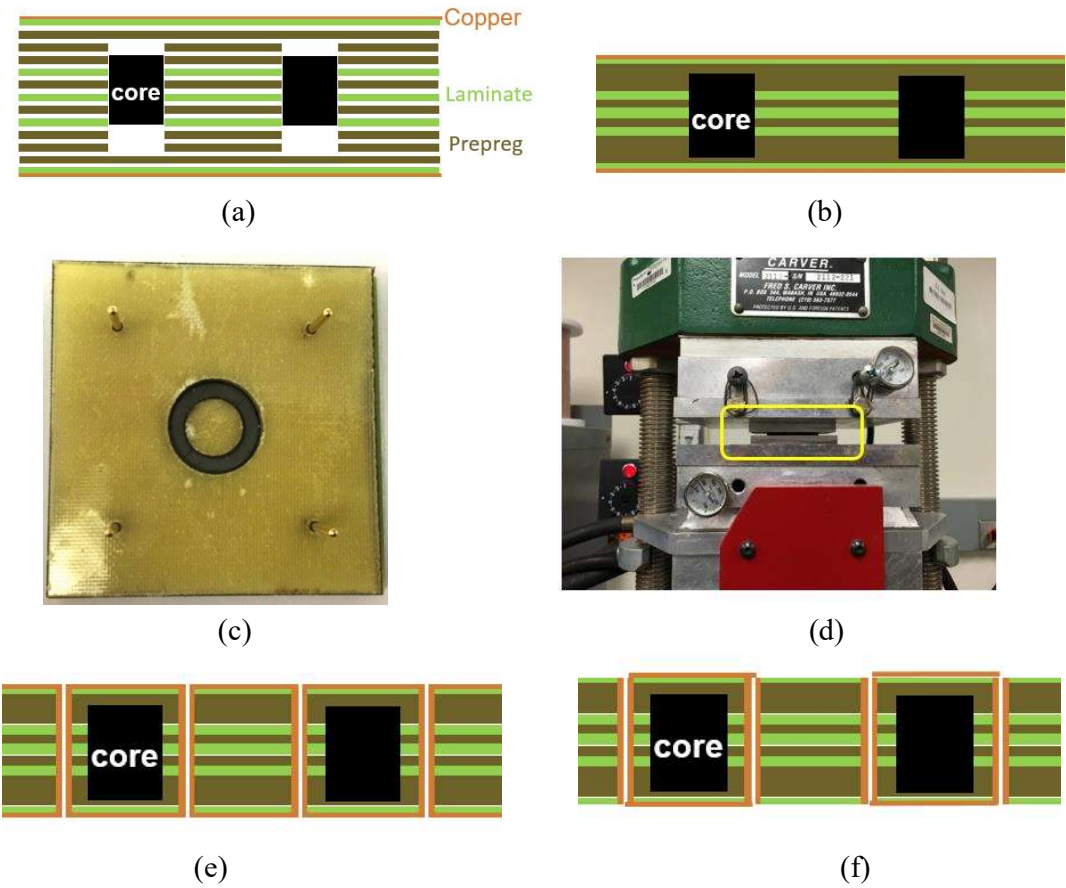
(a) Layer stack before PCB lamination; (b) PCB after lamination; (c) one sample during layer stack before lamination; (d) one sample is under dual stage pressure cycle; (e) Via-hole construction after PCB lamination; (f) winding construction.
